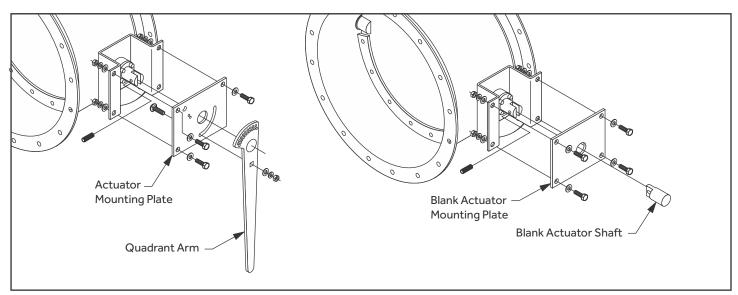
16" - 34" (406.4 - 863.6) Heavy Duty Industrial Damper Actuator Removal for Customer Supplied Actuator.
